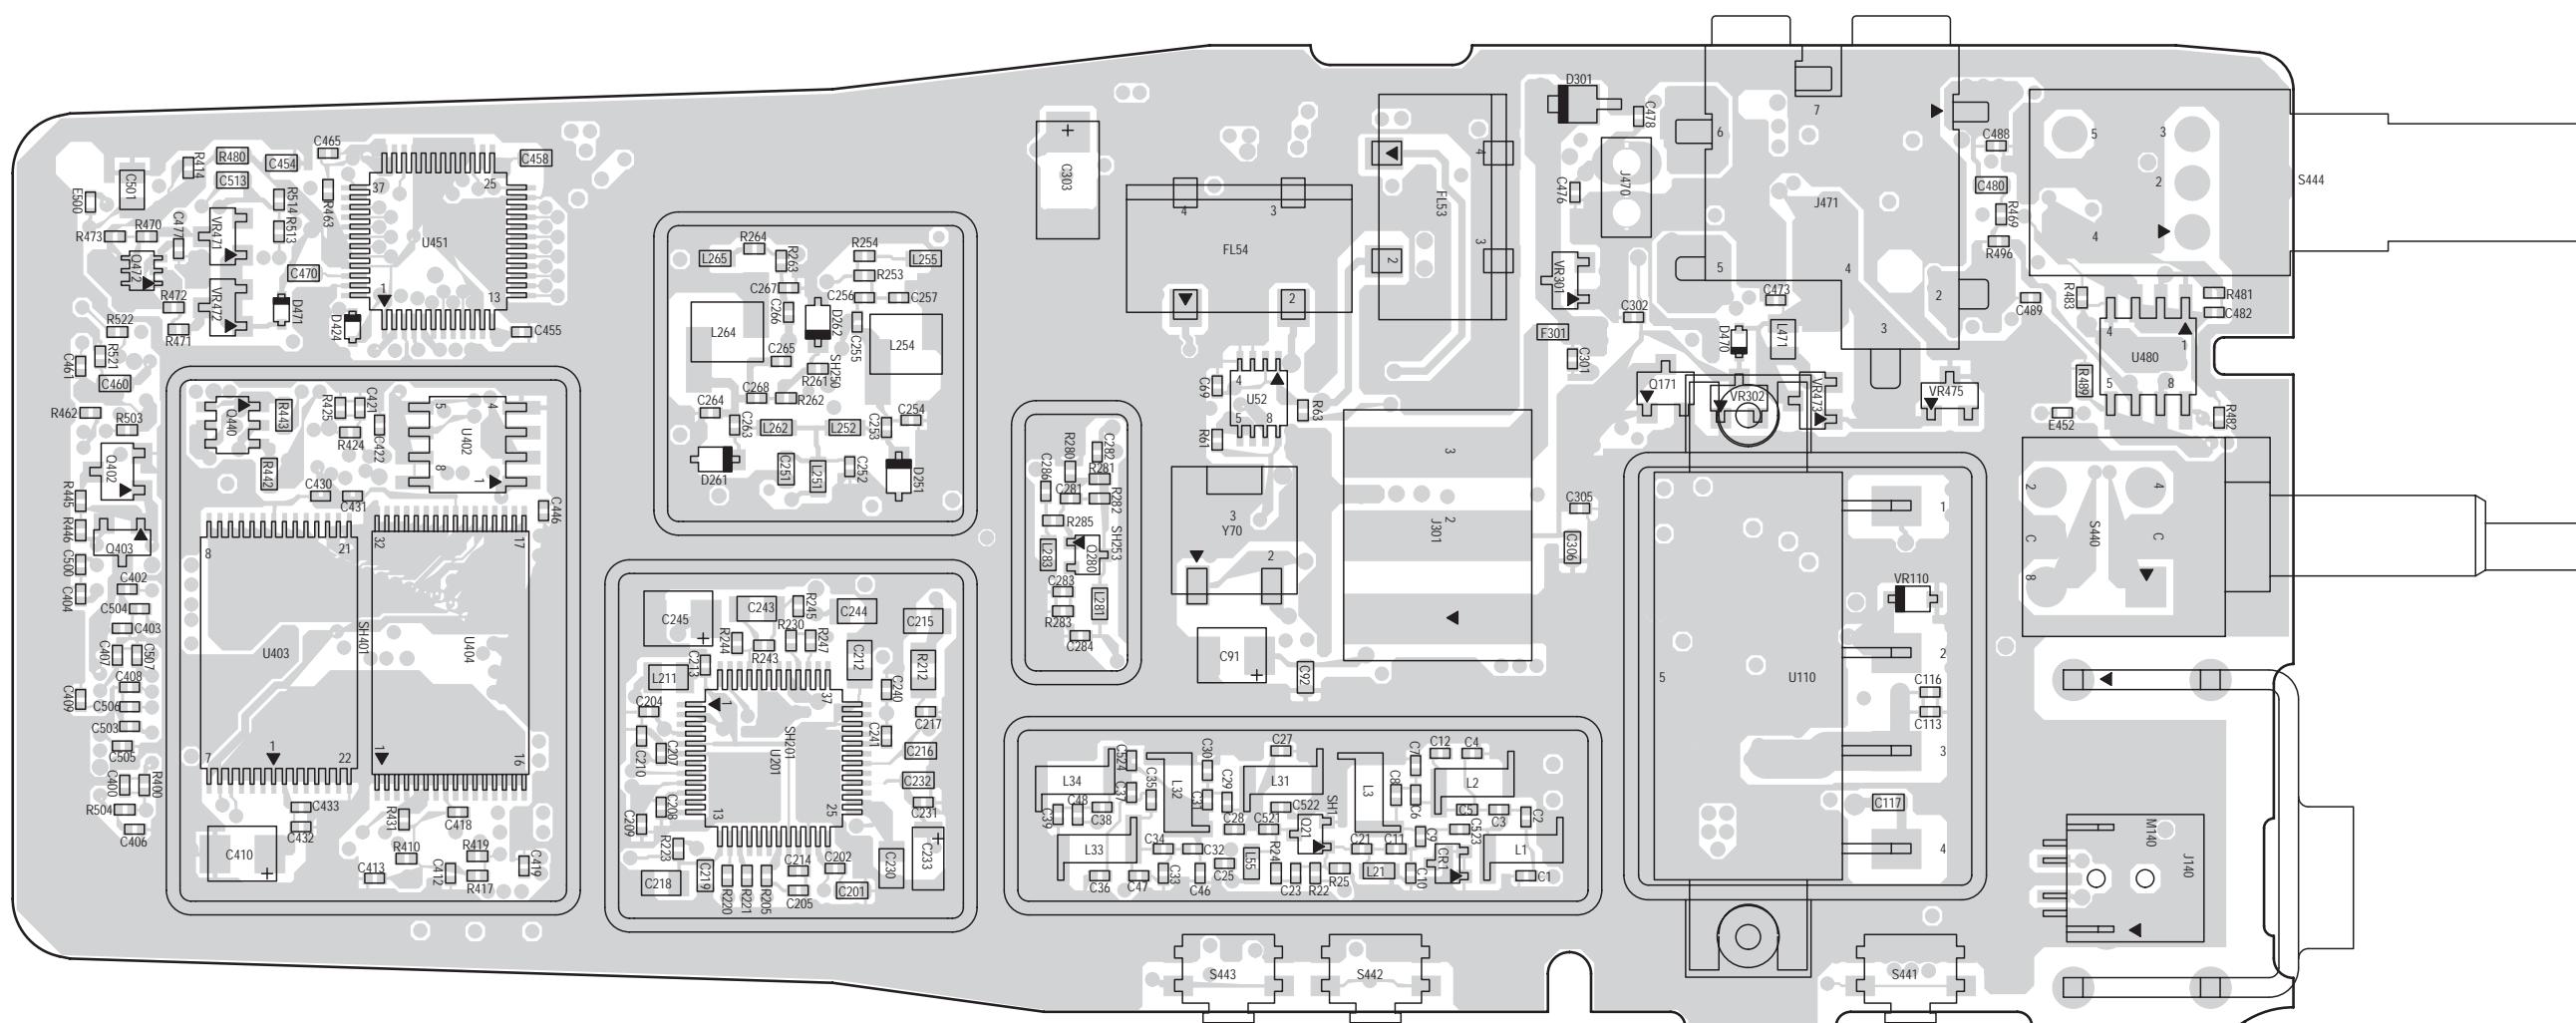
UHF (403-440 MHz) PCB 8486635Z03-O Board Component Side View
